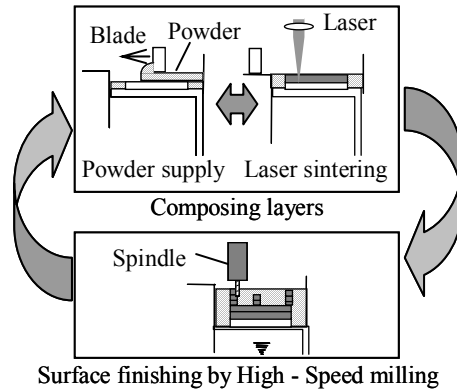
Concept of Milling-Combined Laser Metal Sintering process
